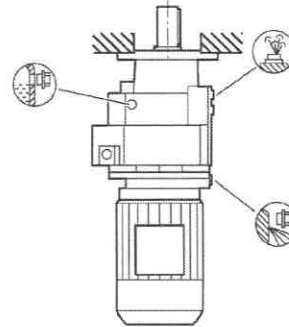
Mounting positions for helical gearbox DF/ZF flange-mounted design and DZ/ZZ with housing flange, sizes 19 - 29
